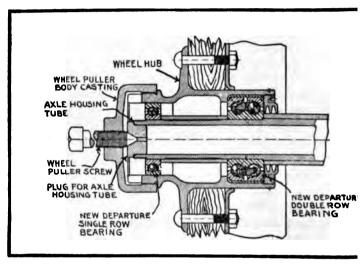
Showing Construction of Simple Wheel Puller for Rea Wheel Hub From Full Floating Rear Axle.
